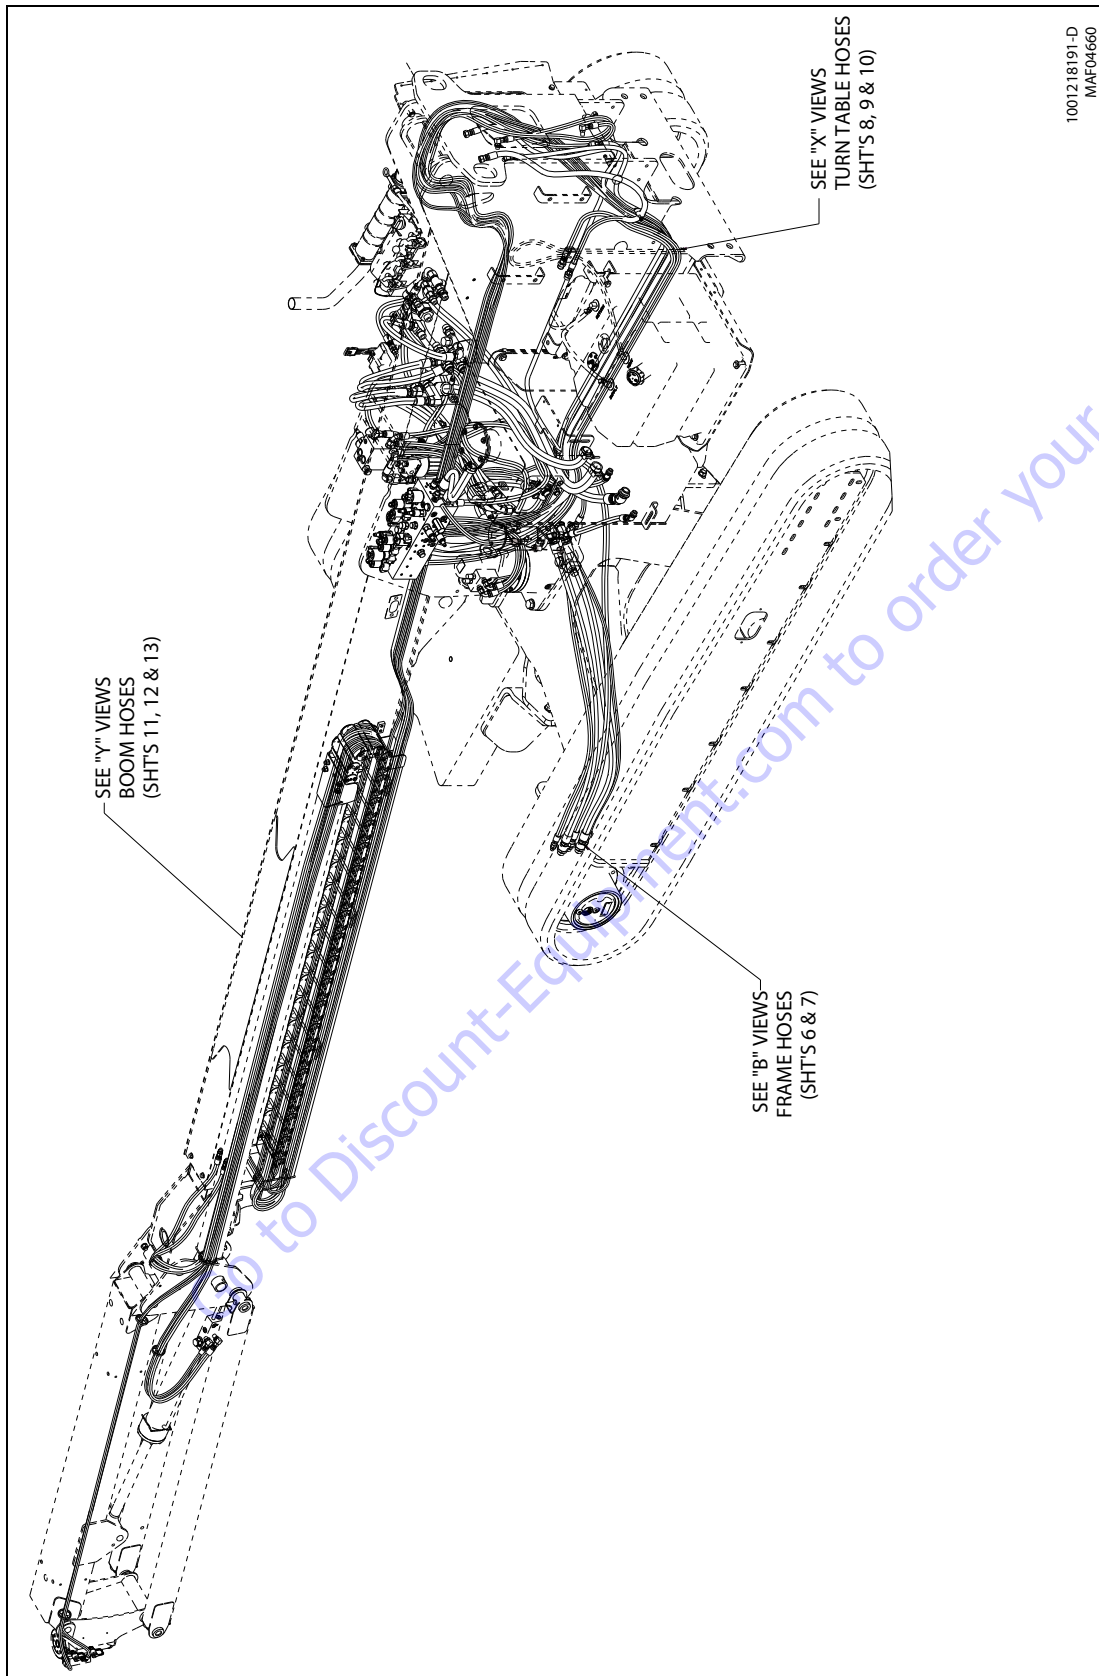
Hydraulic System Installation (460SJC) - Sheet 5 of 15
